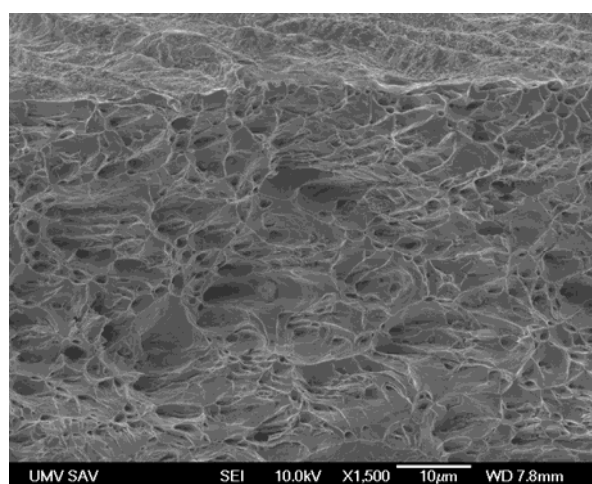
A detail view of fracture surface of TH550CA
